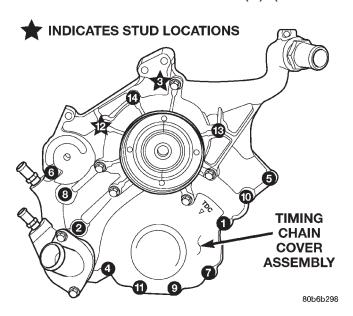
Timing Chain Cover Fasteners - Typical INSTALLATION
